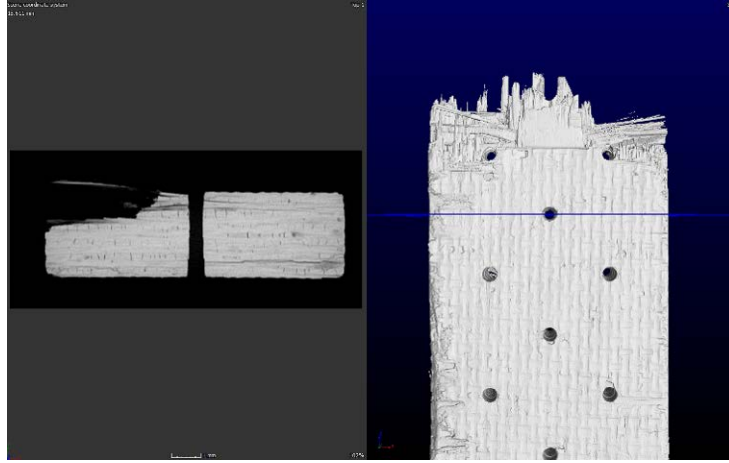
Step 3 – 2D (x-y plane) vs 3D location for specimen #3, tested in tension to failure at 1200°C in air
